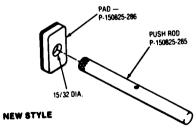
PUSH PAD AND PUSH ROD ASSEMBLY.
